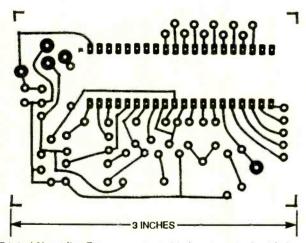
The Digital Humidity Gauge was assembled on two single-sided, printed-circuit boards; a template for one of them—the sensor board—is shown here full size.
